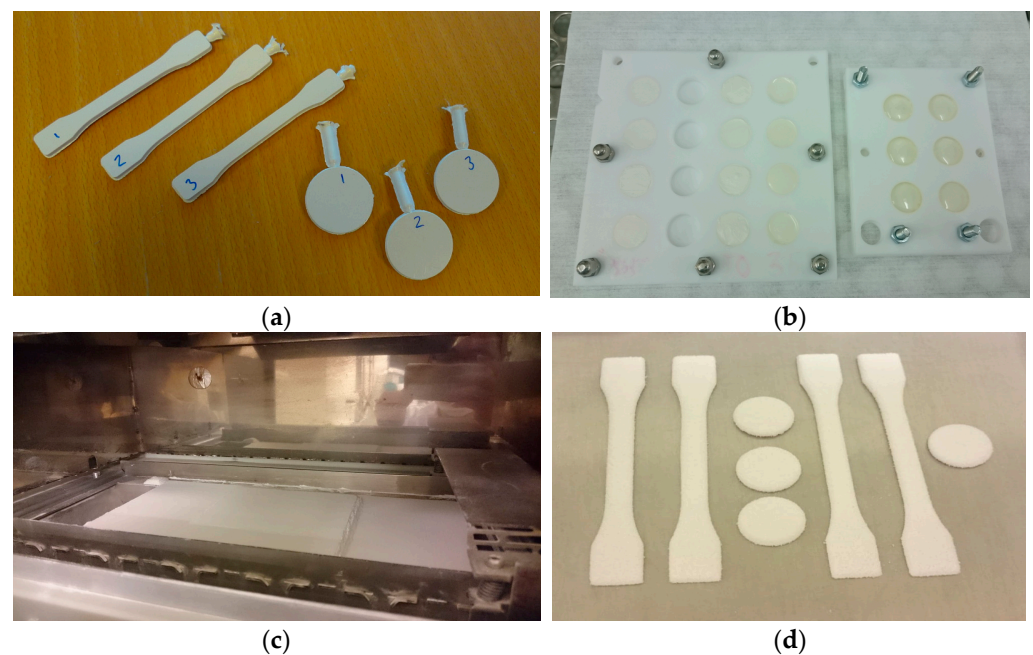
(a) Injection moulded specimens (IM_65BN3); (b) cast specimens in Teflon moulds; (c) PBF 3D printer; and (d) PBF specimens.
